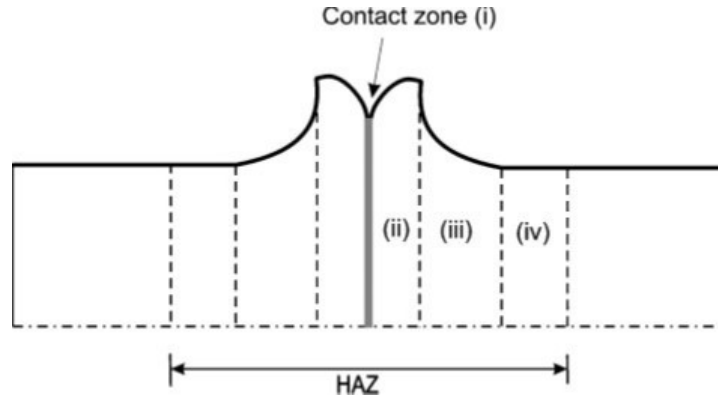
Schematic illustration weld sections within HAZ in rotary friction welding: (i) contact zone, (ii) fully plasticized zone, (iii) partly deformed zone and (iv) undeformed zone [73]
